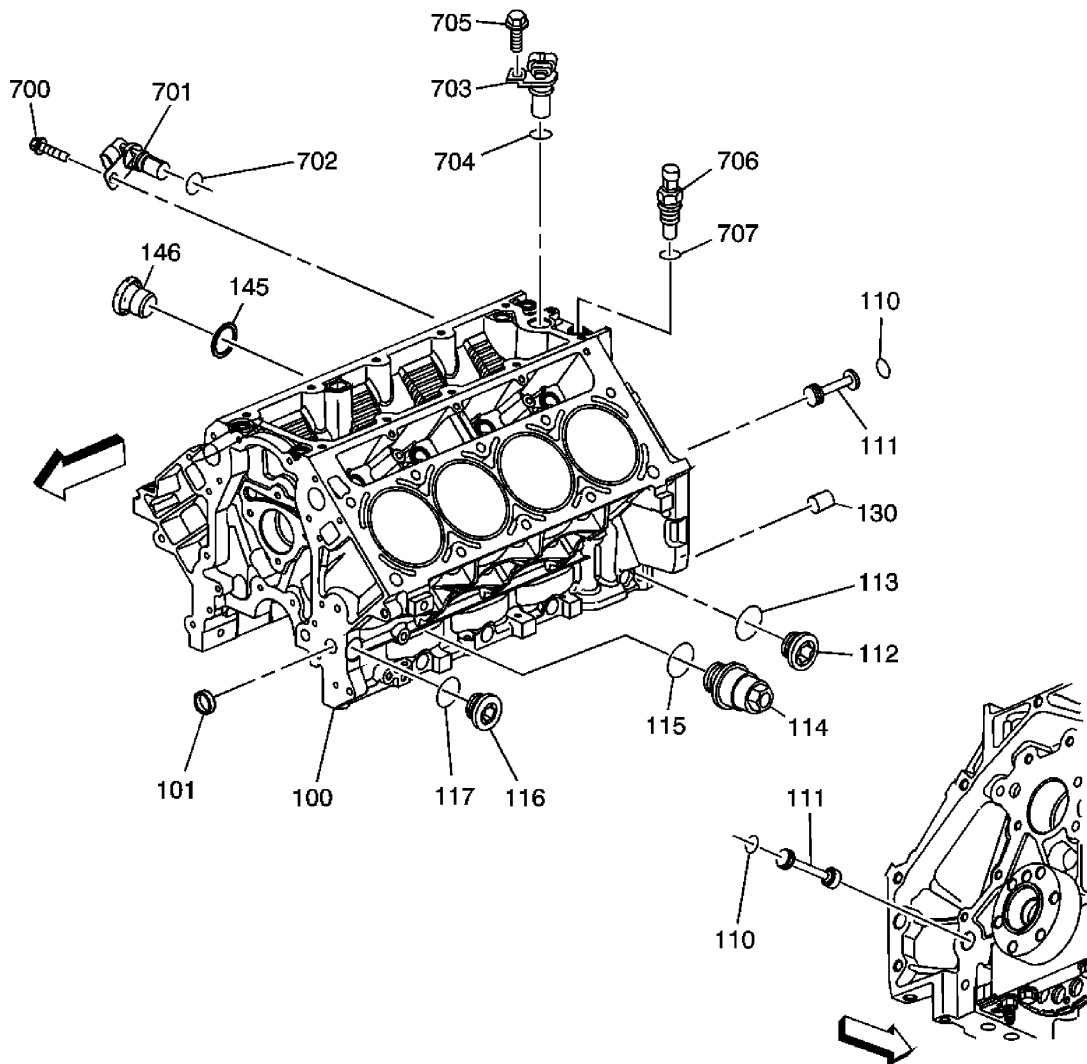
Engine Block Plugs/Sensors Disassembled View
